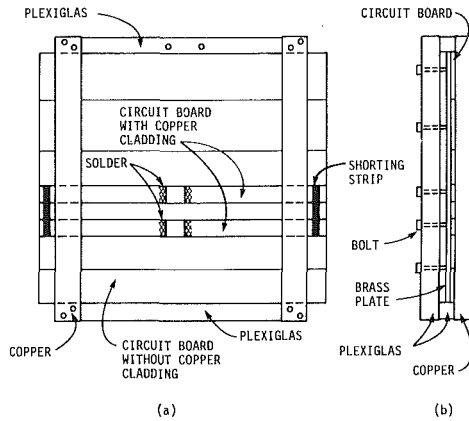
Test-section assembly for multiple heaters: (a) front view, (b) view from left
